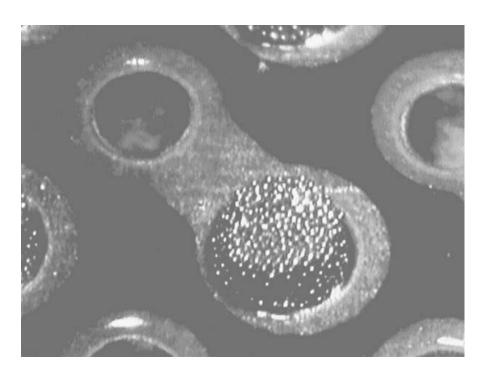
Micrograph of an PBGA Test Board Pad with Eight Mils of Screenprinted Solder Paste (Magnification of Approximately 40X, 45°)
